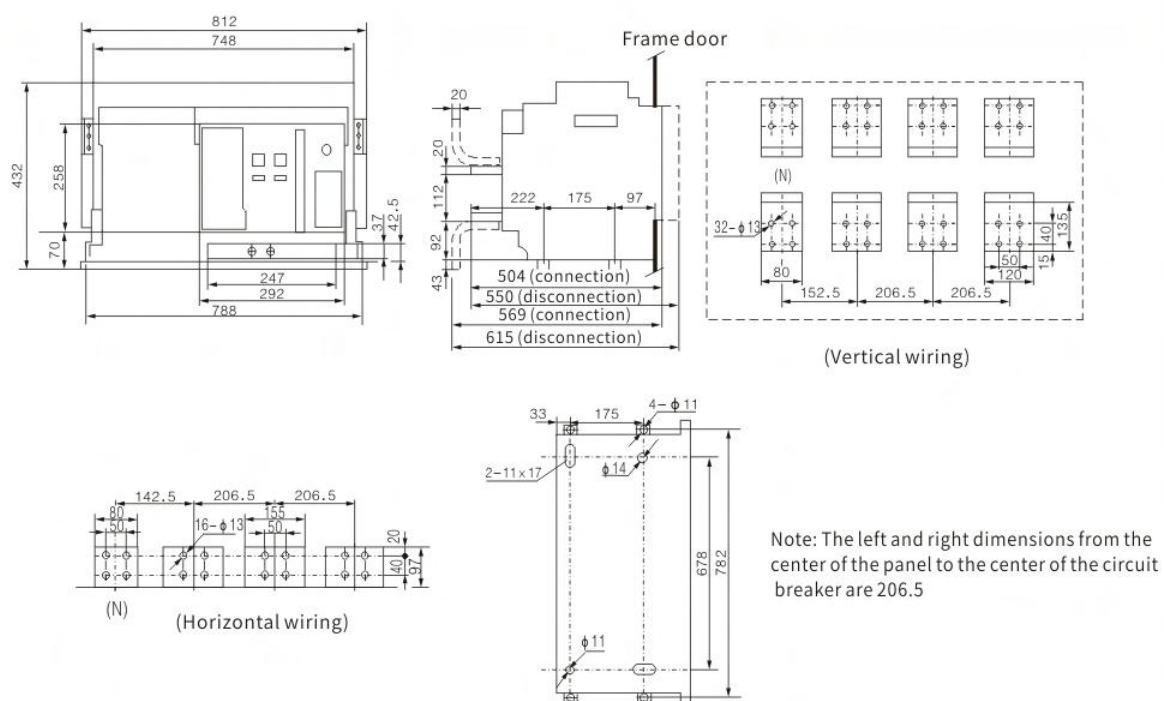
Outline and installation dimension of the draw-out type circuit breaker (JUV1 1-4000/4)
